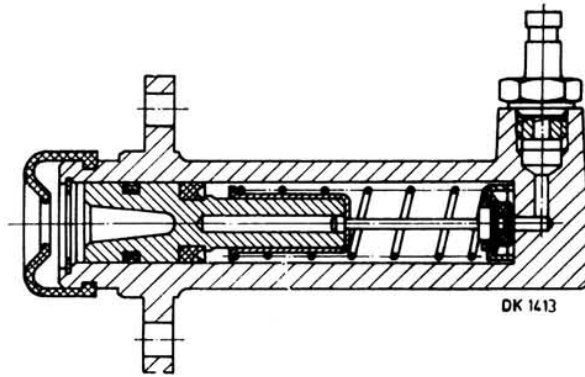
/2 - Clutch Master Cylinder - Sectional View
